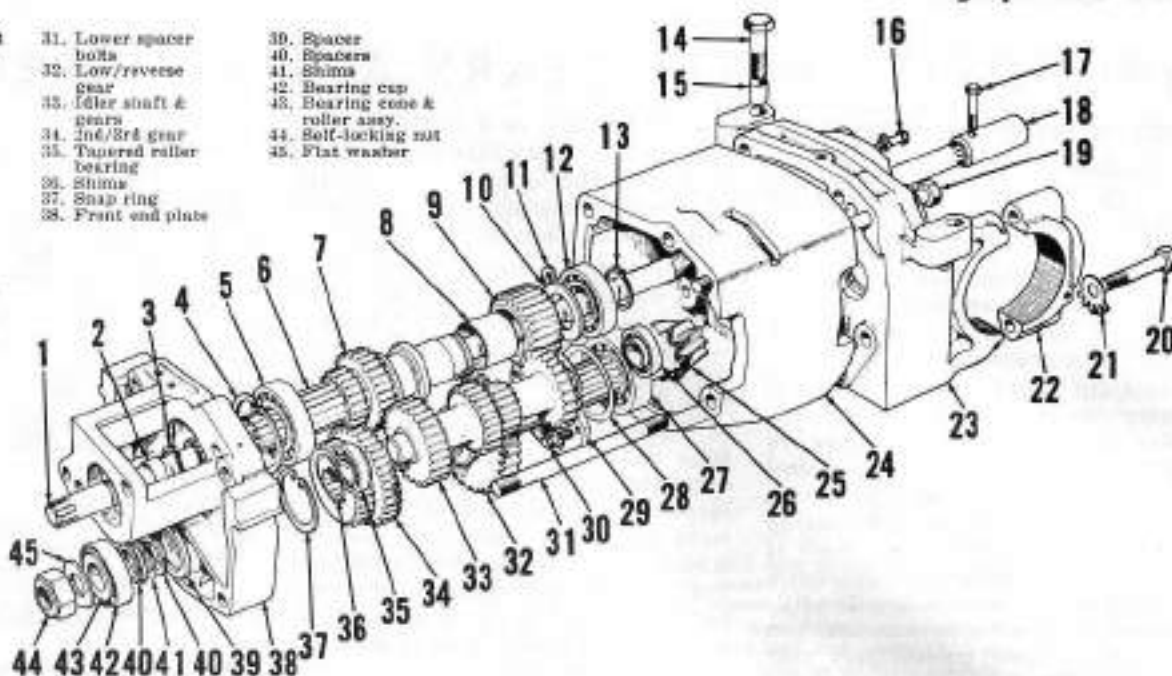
Exploded view of model 1200 six-speed transmission. Refer also to cut-away view in Fig. 112 showing driveshaft and pinion shaft assemblies. On 12-speed models, construction is similar except for creeper drive components and special front end plate shown in Fig. 111. Refer to Fig. 105 for exploded view of six-speed transmission shift rails, forks and shift lever assemblies.
